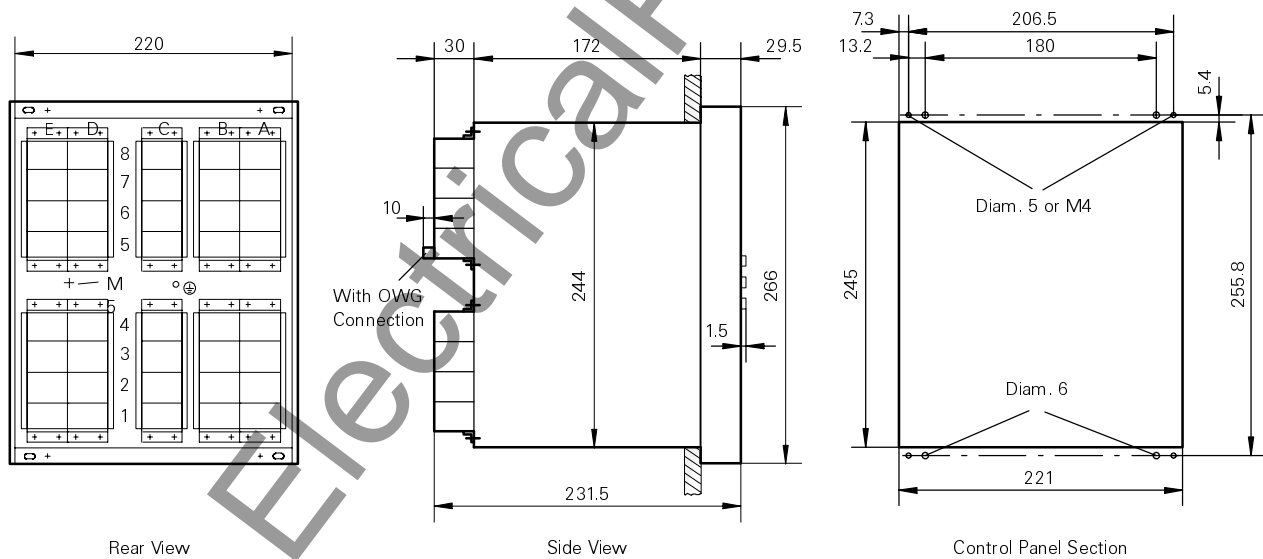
Dimensional Drawing of 7XP2040-2 for Panel Flush Mounting or for Cubicle Installation, Device Version 7SA519 (all dimensions in mm)
